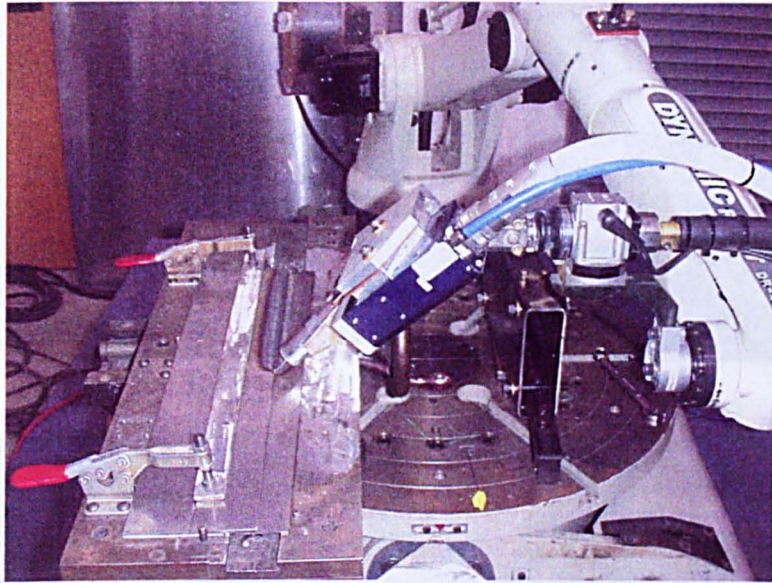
Lap Joint Test Setup for Evaluating VP-GMAW Power Supplies with Moving Table Welding Fixture
